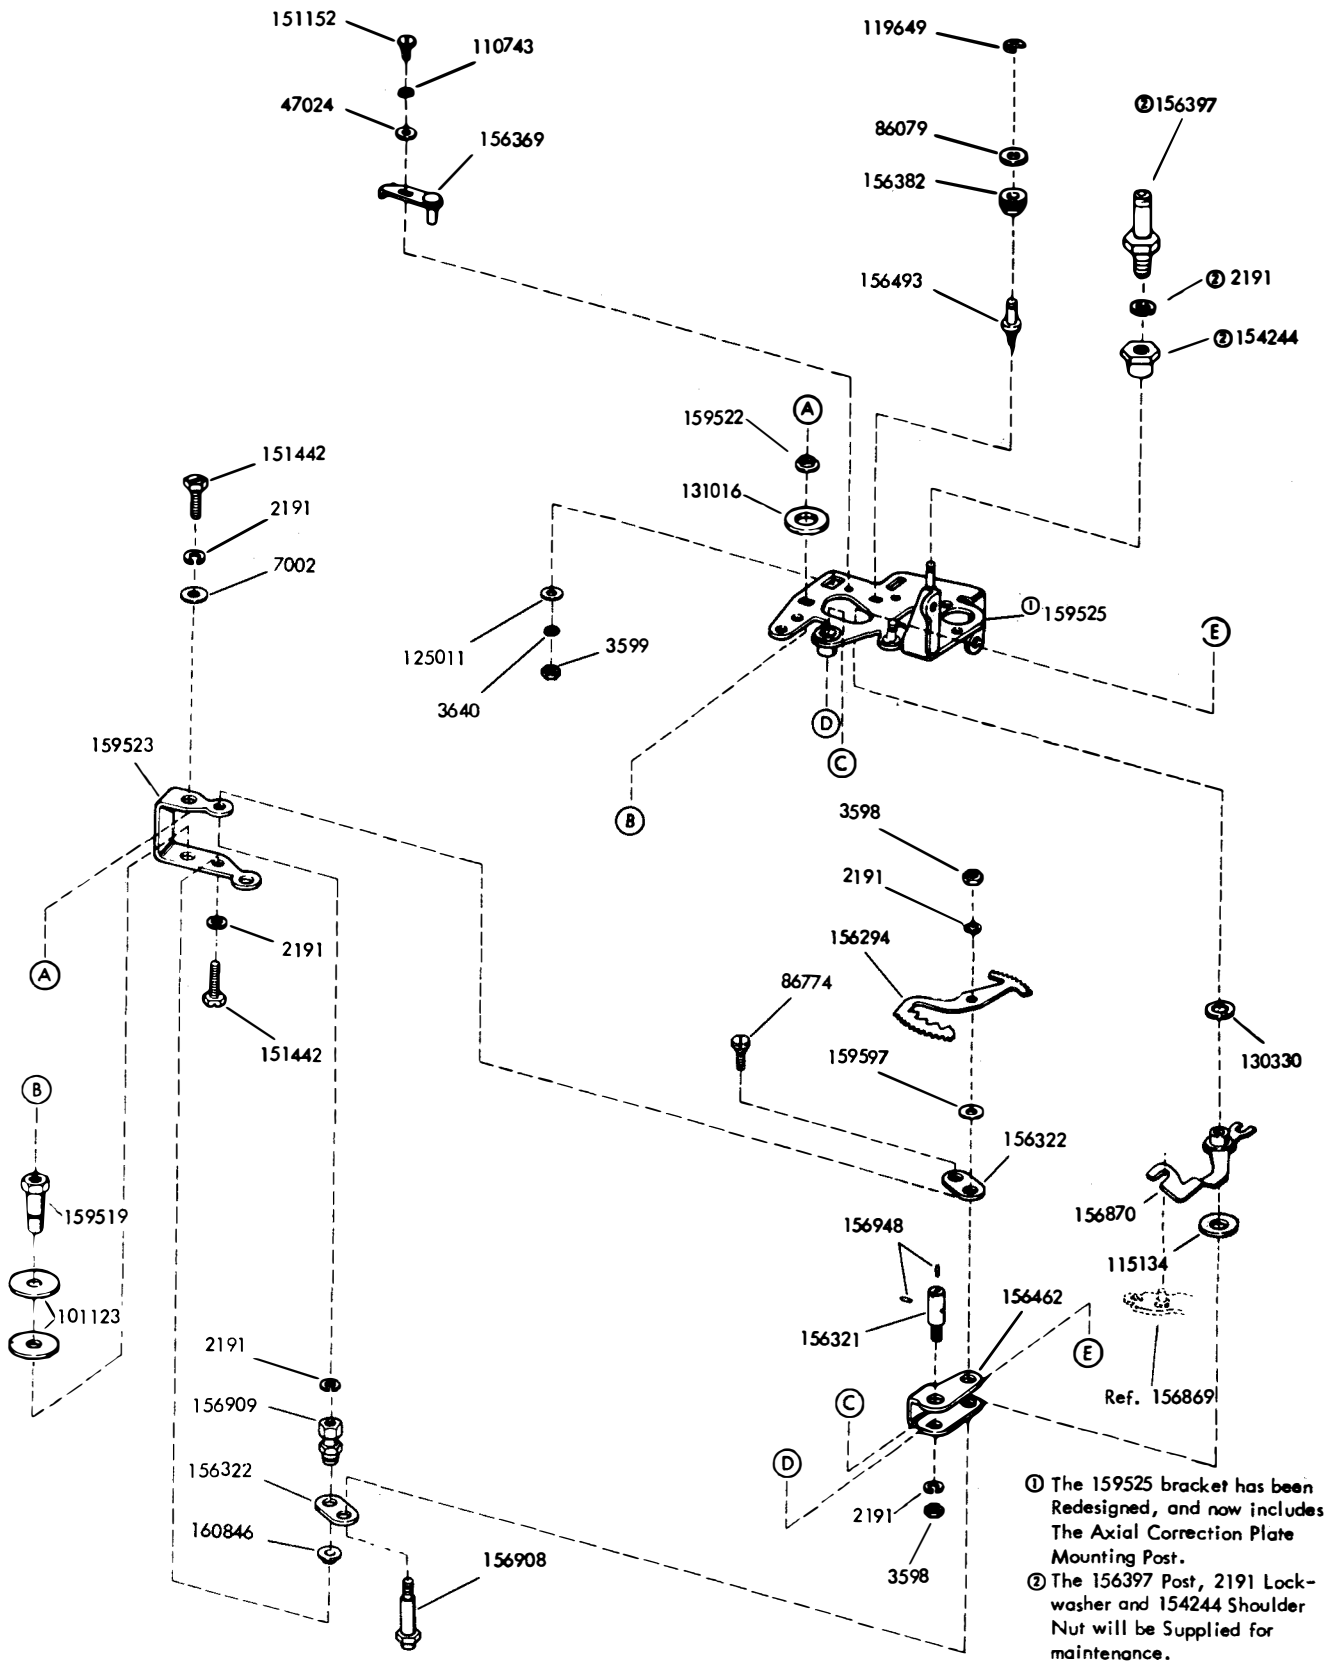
Axial Positioning Mechanism (Sheet 1 of 2)
